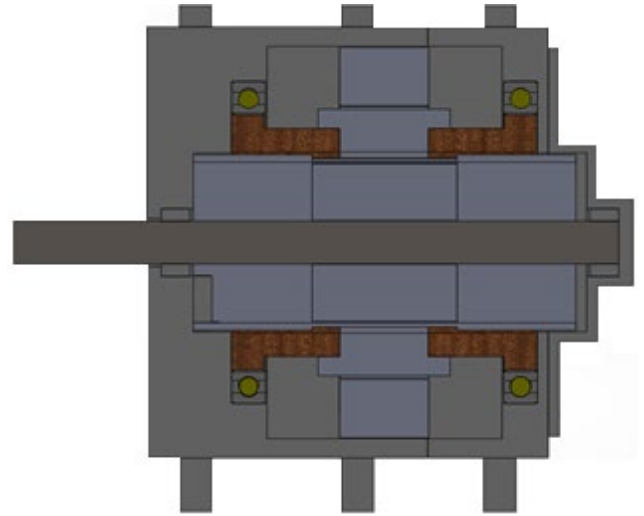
Longitudinal cross-section assembly drawing of induction motor with an integrated magnetic gear
